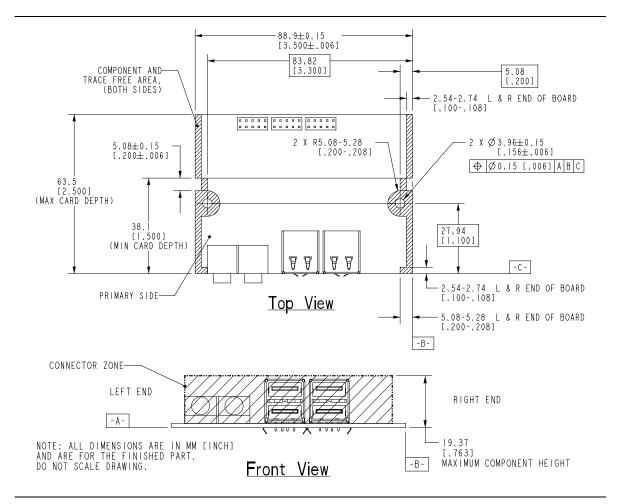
Front Panel I/O Board Dimensions (Top and Front Views)
